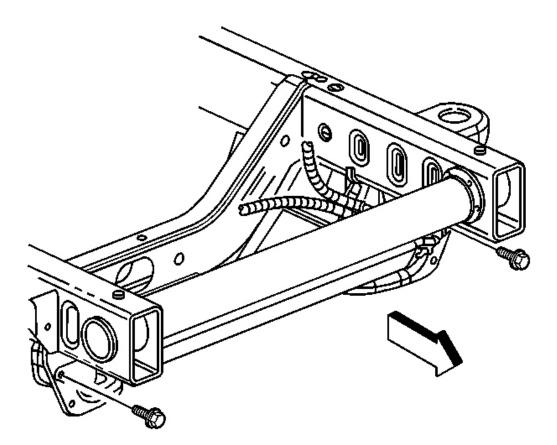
View Of Power Steering Cooler Mounting Bolts Courtesy of GENERAL MOTORS CORP.
